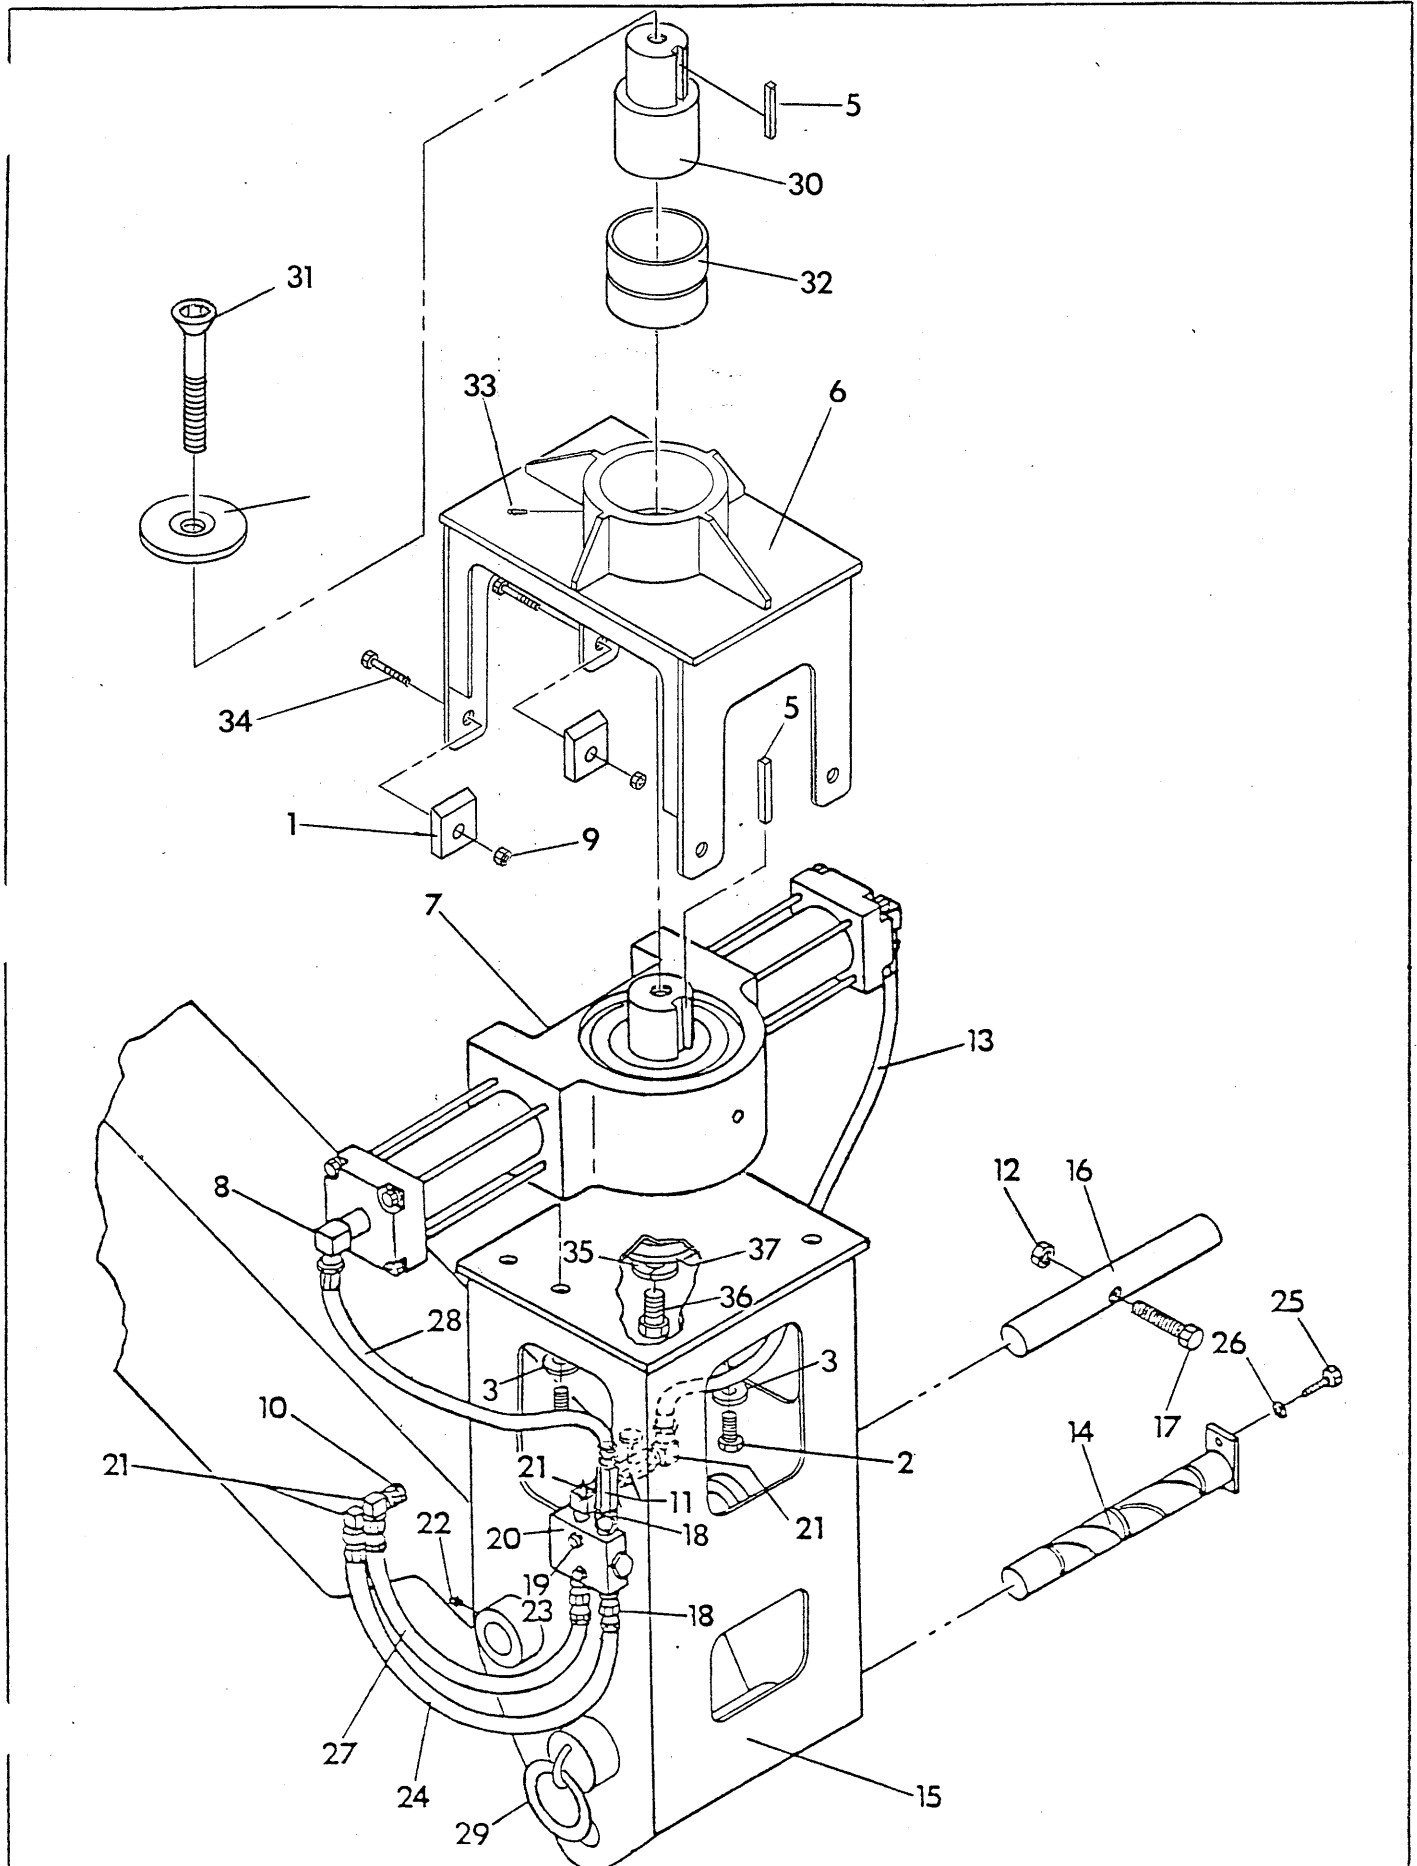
Z PLATFORM ROTATION ASSEMBLY (Actuator with integral pinion-shaft)
